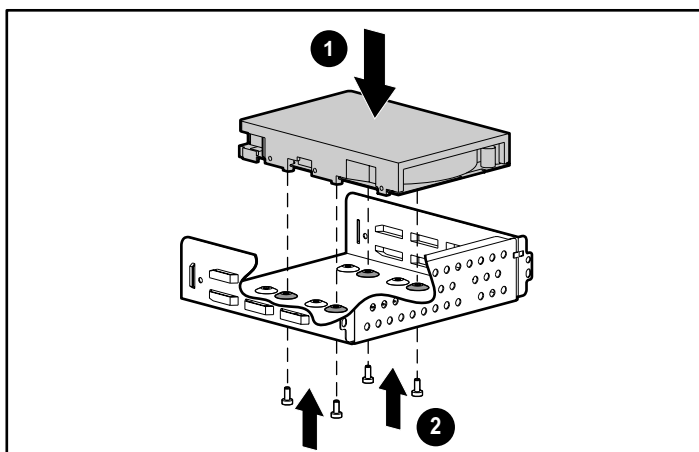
Installing a hard drive into a removable media bay drive tray
